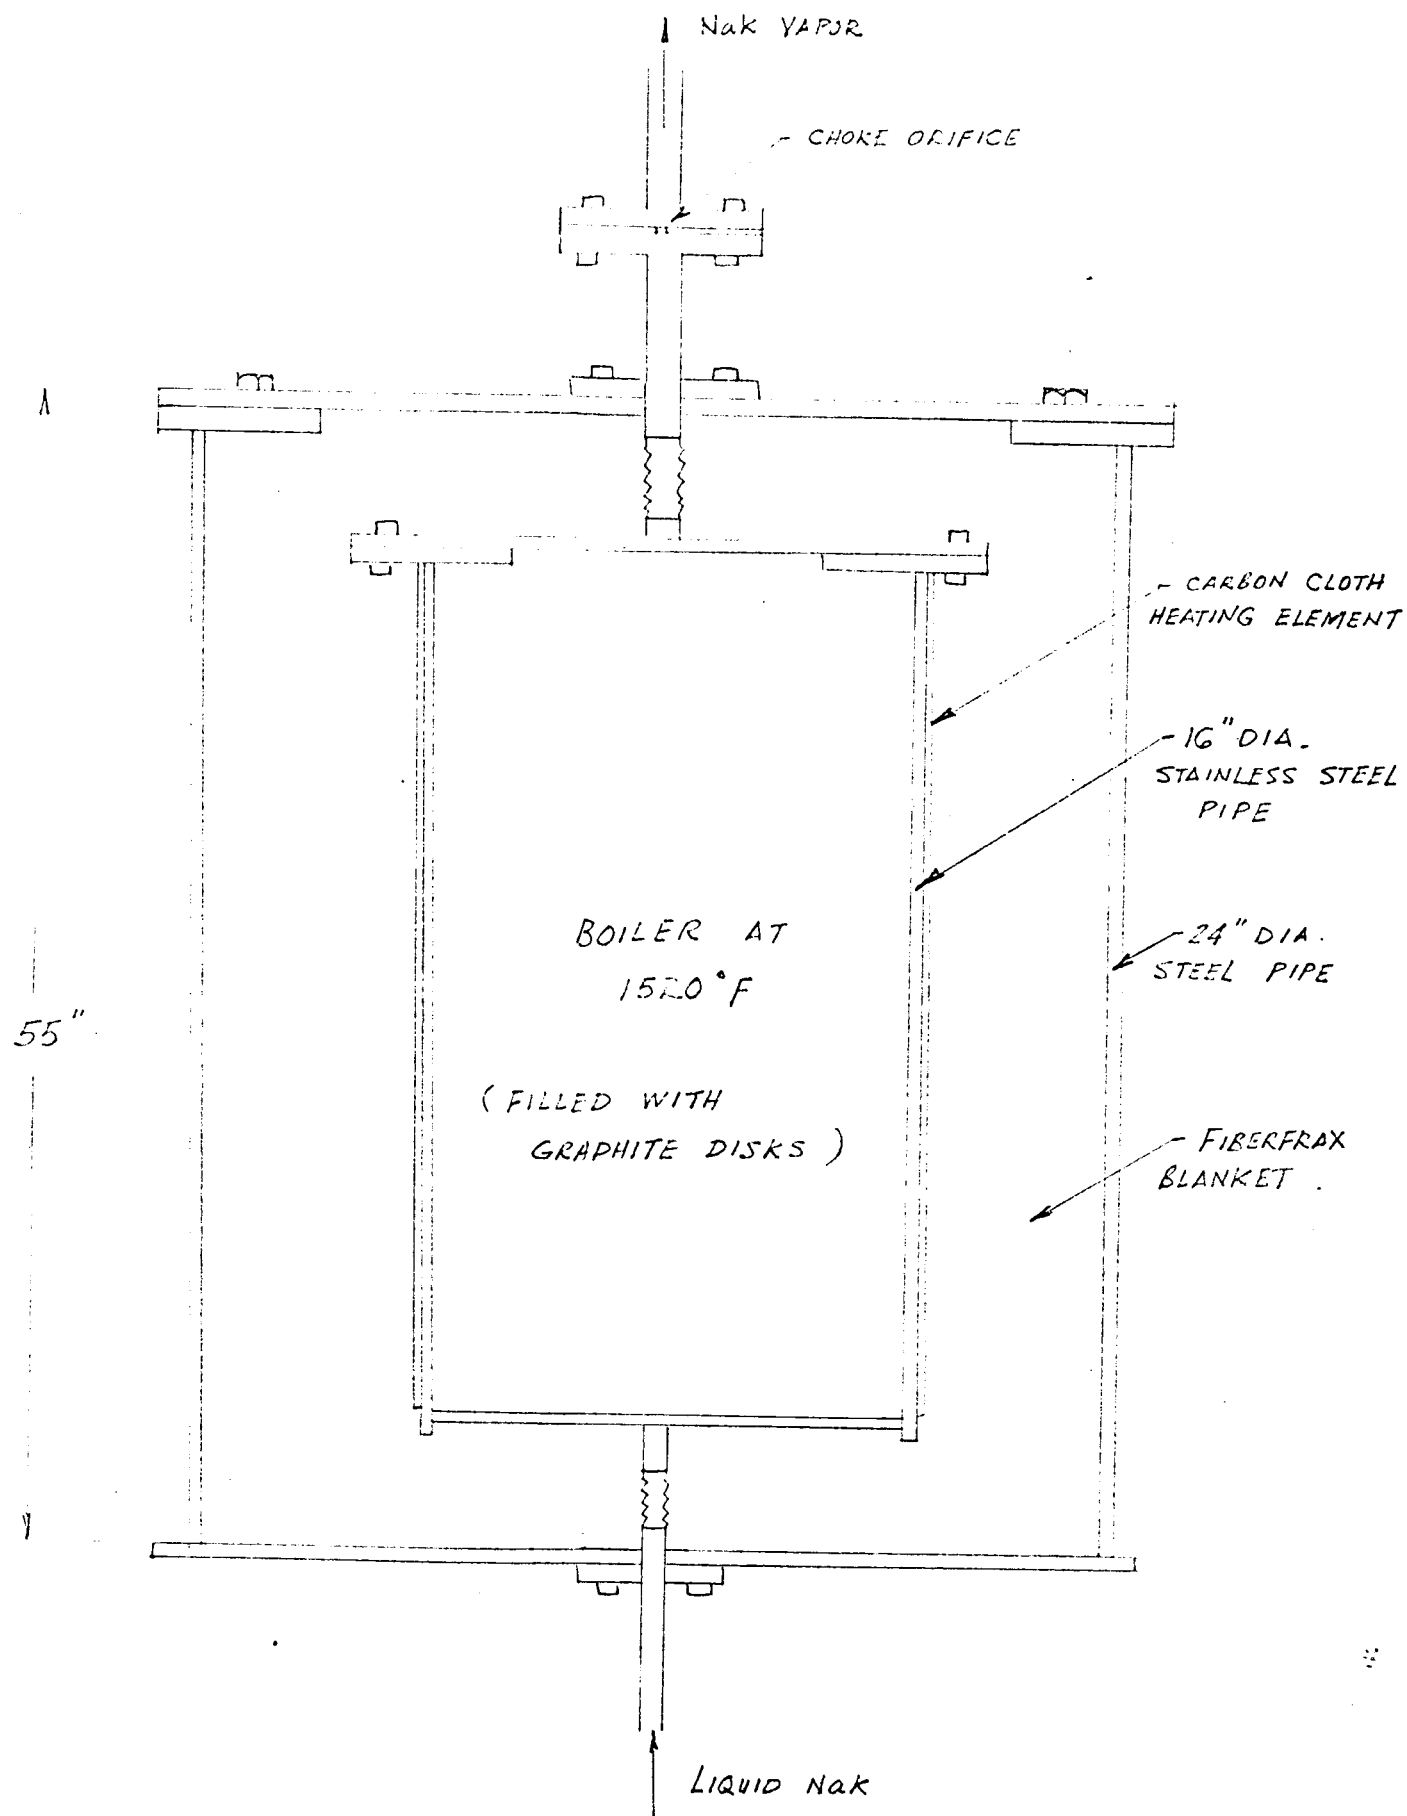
SKETCH DRAWING OF NaK BOILER
